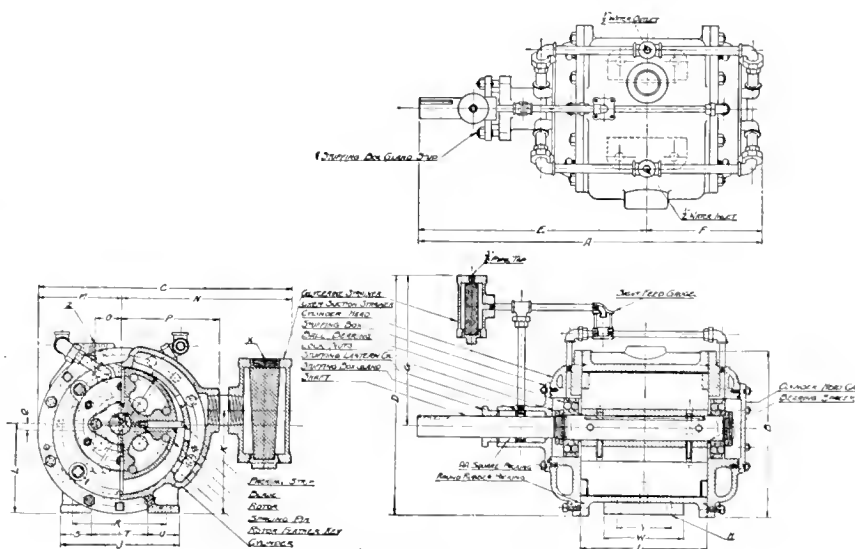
ROTOR COMPRESSOR OF THE CLOTHEL REFRIGERATING MACHINE
